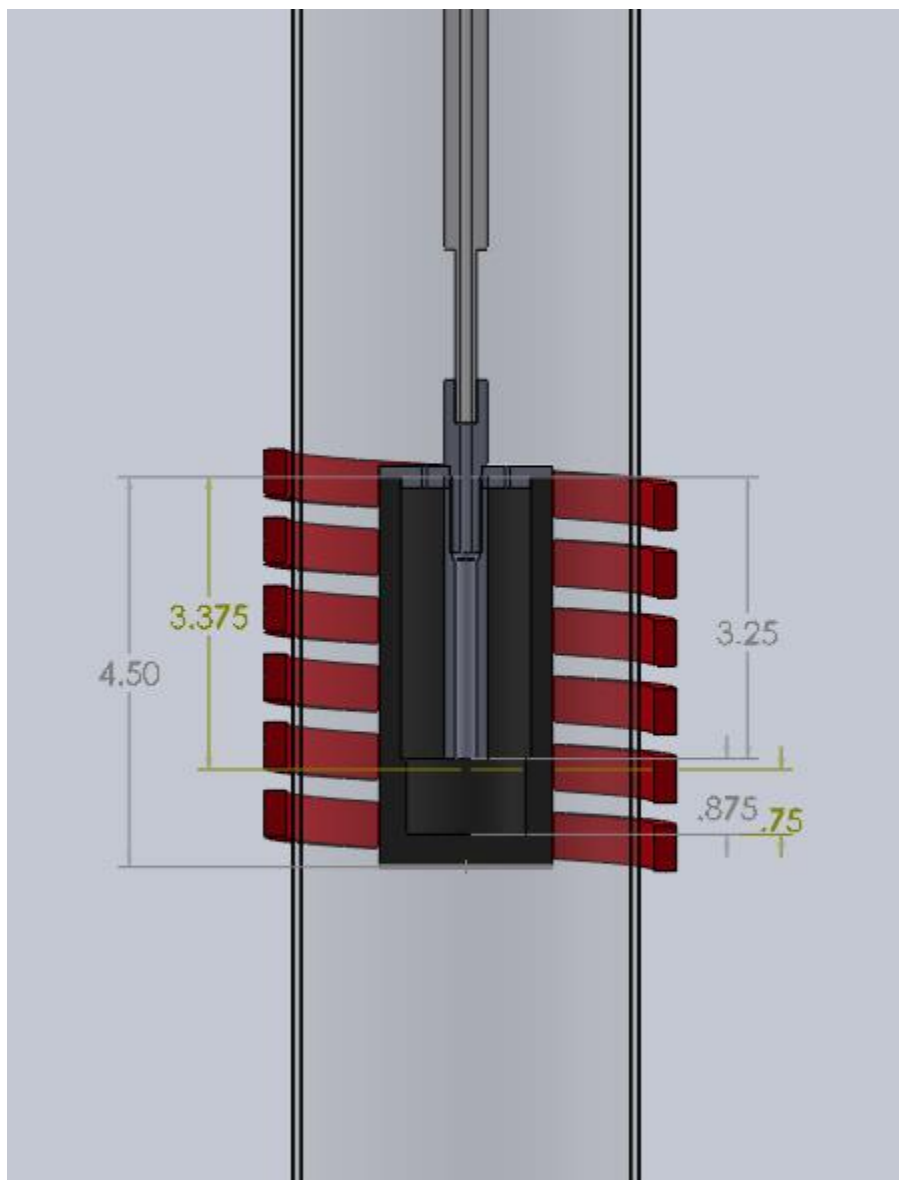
CAD drawing of the crucible used for PAN fiber conversion. Measurements are in inches.
